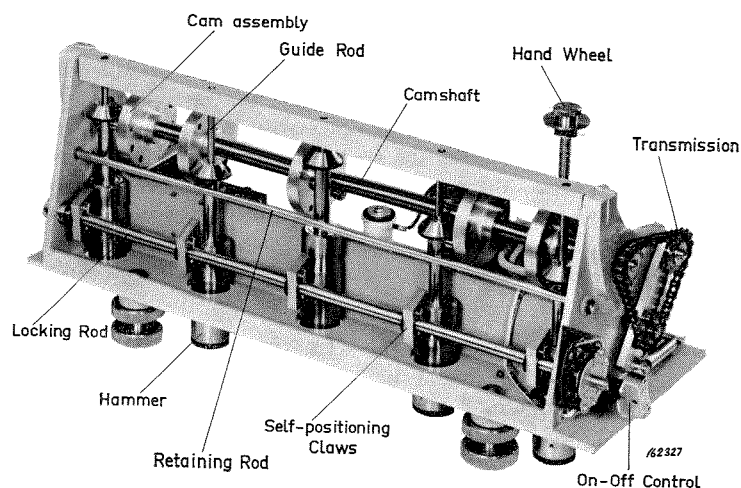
The mechanism of the Tapping Machine Type 3204.
